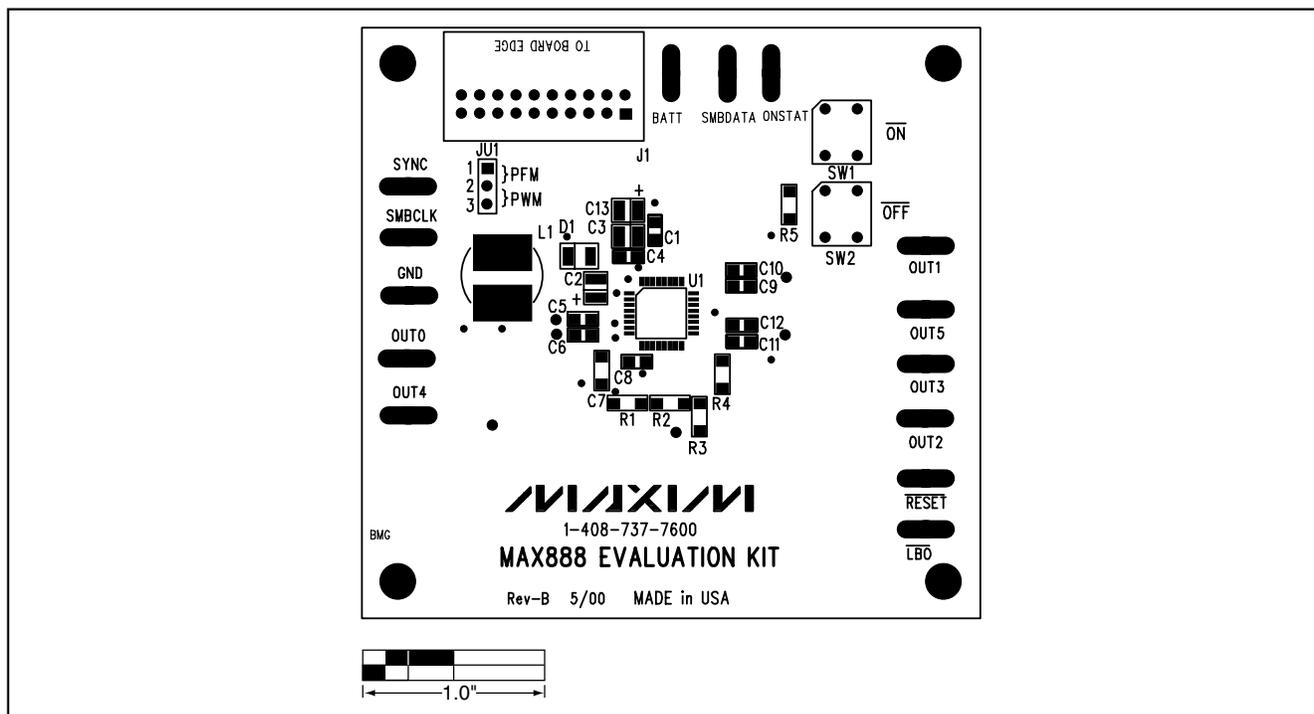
MAX888 EV Board Component Placement Guide—Component Side
